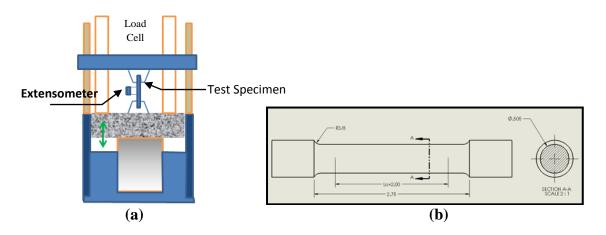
(a) Schematic view of Tinius-Olsen Tensile Testing machine (b) Metal tensile specimen recommended by ASTM (Gage length $L_0= 2.00$ in, D=.505in)
